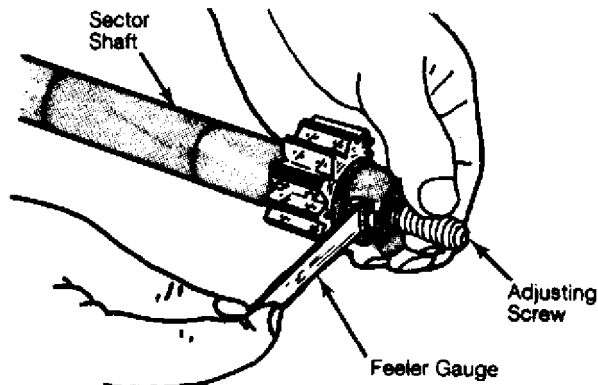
Checking Sector Shaft Adjusting Screw End Clearance
